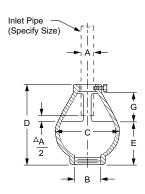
T THREADED OUTLET ONLY (Specify A + B)
